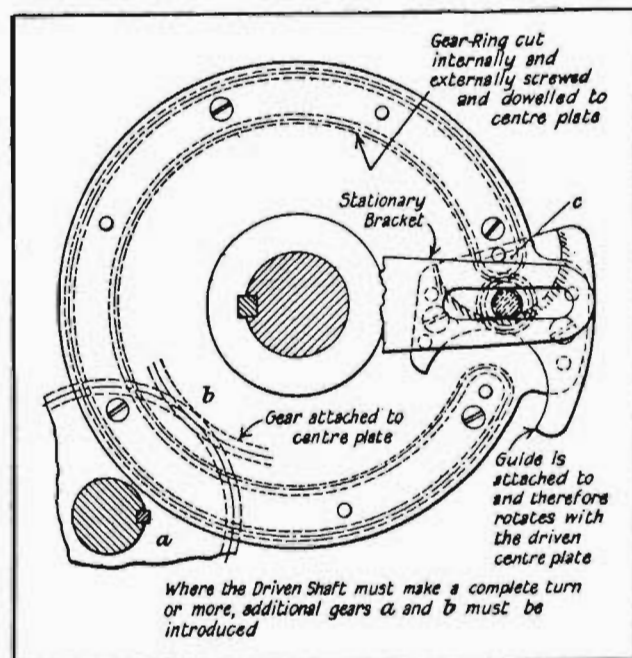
Mangle Gear Shaft-reversing Mechanism with Additional Gears for Obtaining a Complete Turn or More than One Turn
